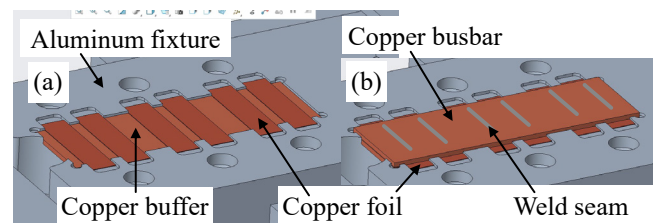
CAD illustration of the aluminum clamping fixture in disassembled (a) and assembled (b) configuration.
